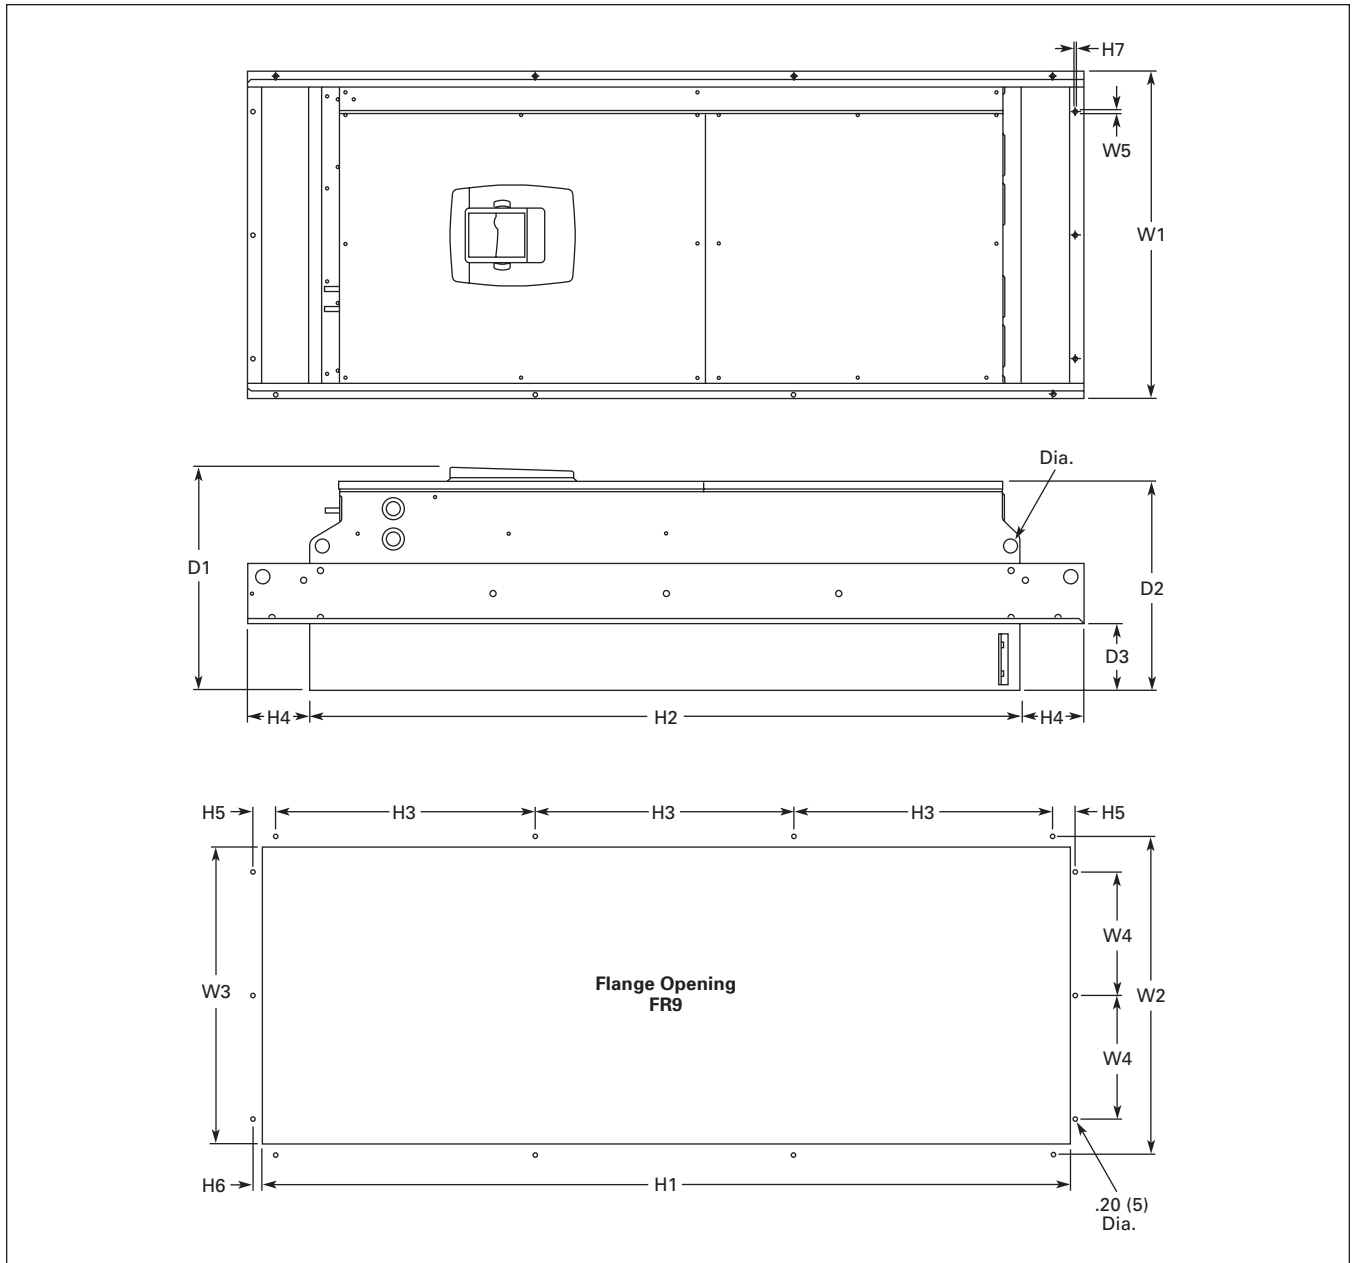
HVX9000 Dimensions, NEMA Type 1 and NEMA Type 12 FR9 with Flange Kit
